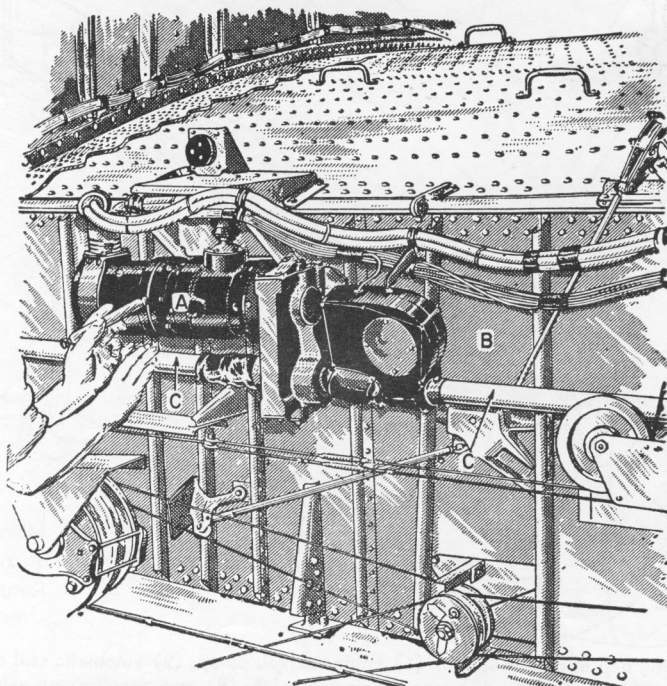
Flap actuator motor (A) on the Boeing B-29 Superfortress is located on the aft face of rear spar (B). Through internal gear reduction, the 24-volt 31-lb 4-oz motor develops 1,500 lb-in. torque on torque tubes (C).
